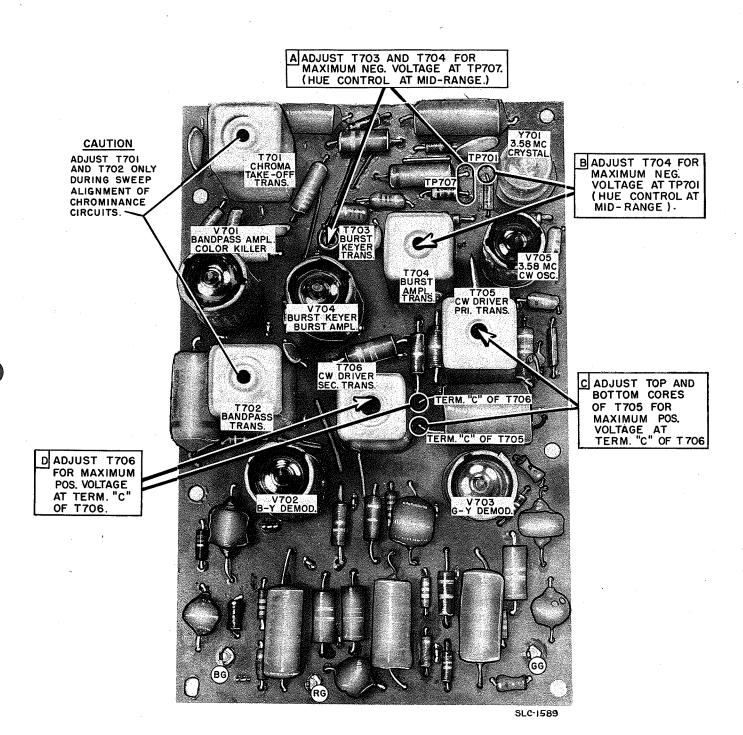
Test Points and Adjustments—AFPC Alignment—CTC5 Chassis—Chassis Need Not Be Removed From Cabinet to Make These Adjustments.
